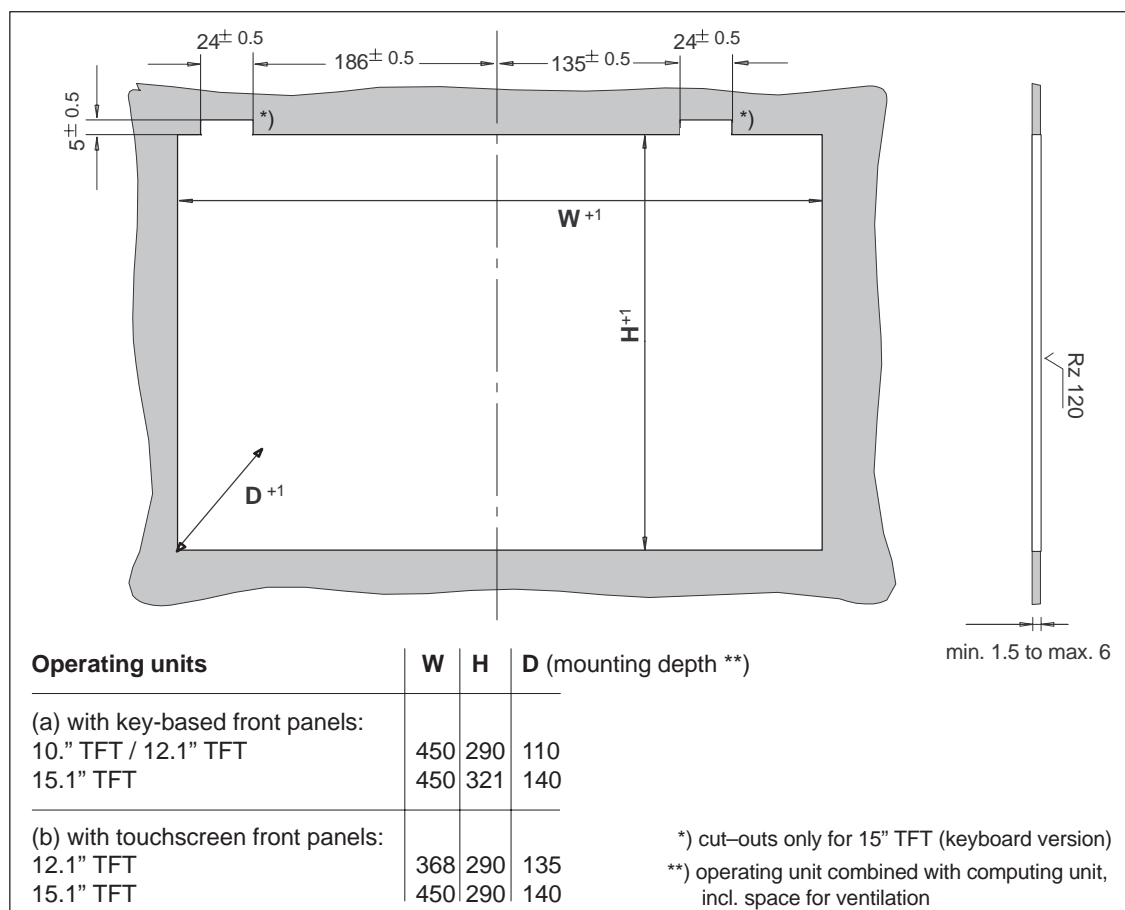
Mounting cut-out for standard mounting of Panel PC 670 (width x height x depth in mm)
